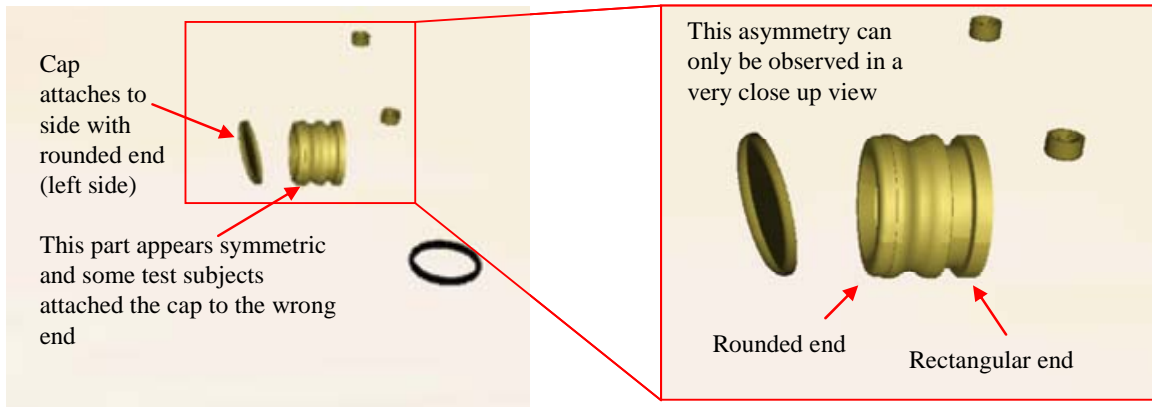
Screenshot of a Type B step – Assembling the environmental seal to the nozzle.
